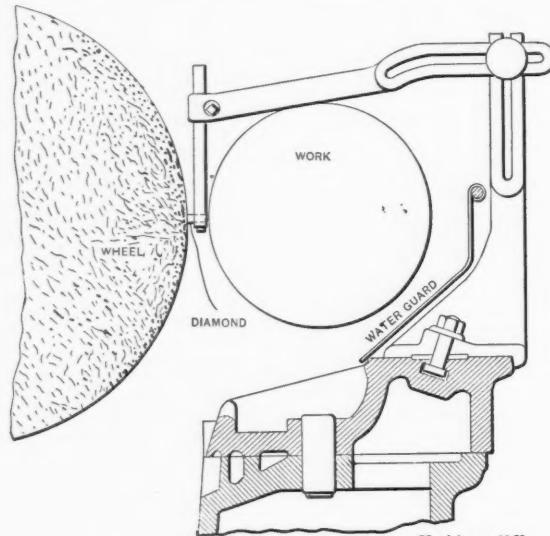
Fixture for Truing Emery Wheel with Diamond.
